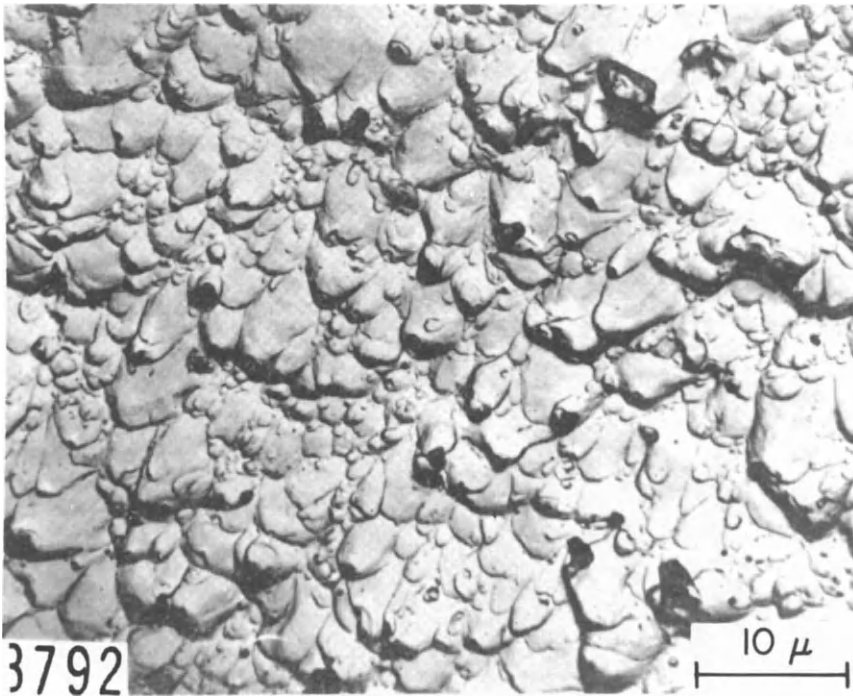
Typical shear rupture dimples on surface of a shear lip in a steel specimen 3000X reduced in reproduction.^(9,12)
